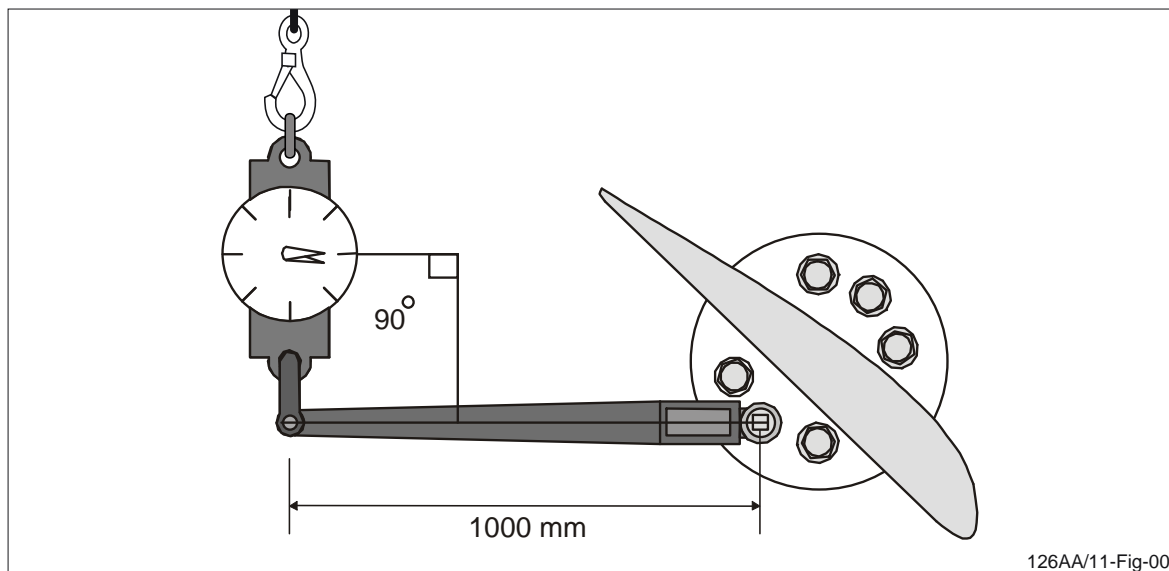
Final tightening of the blade bolts alternative 1: Dynamometer and torque wrench attached to a blade bolt.
